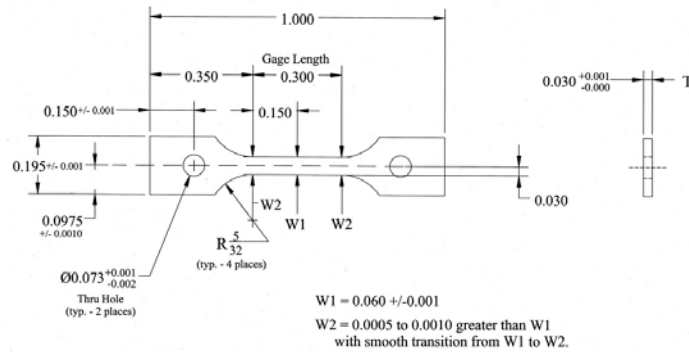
Schematic drawing of the subsized sheet-type tensile specimen machined from the creep-tested specimen.
